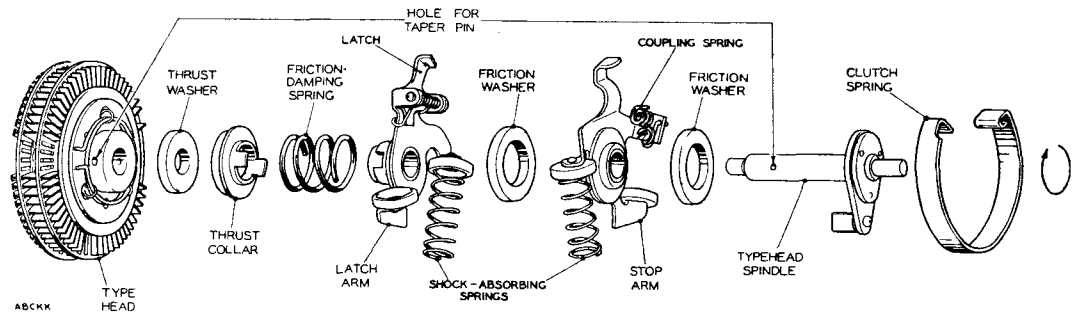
EXPLODED SKETCH OF TYPEHEAD.
